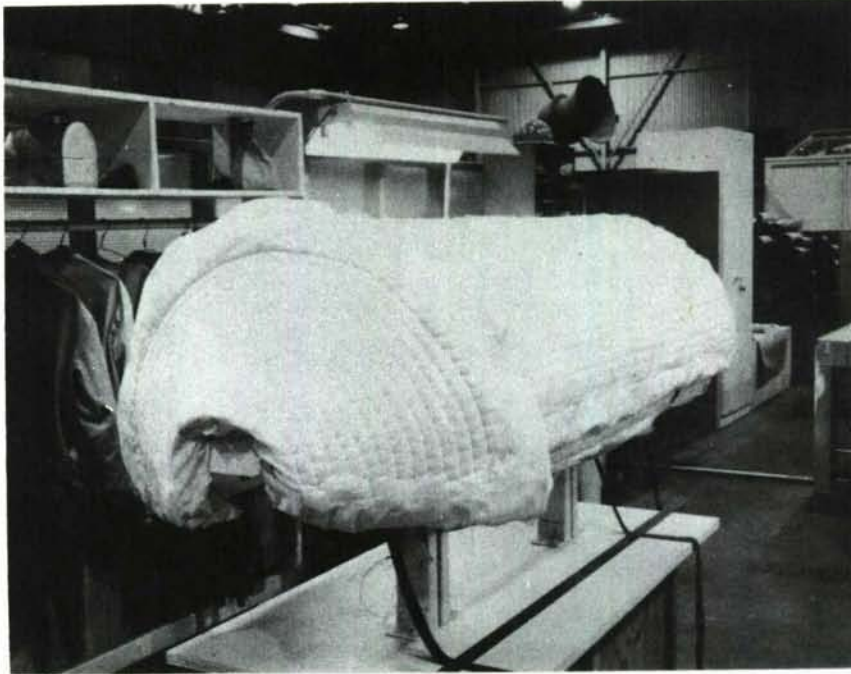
INSULATION BLANKET ASSEMBLY - CONE ENDS
